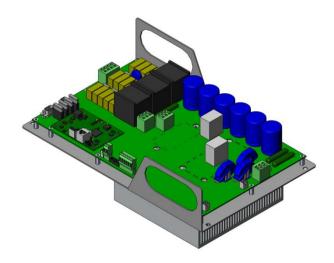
28 V GPU Board / Inverter Module
